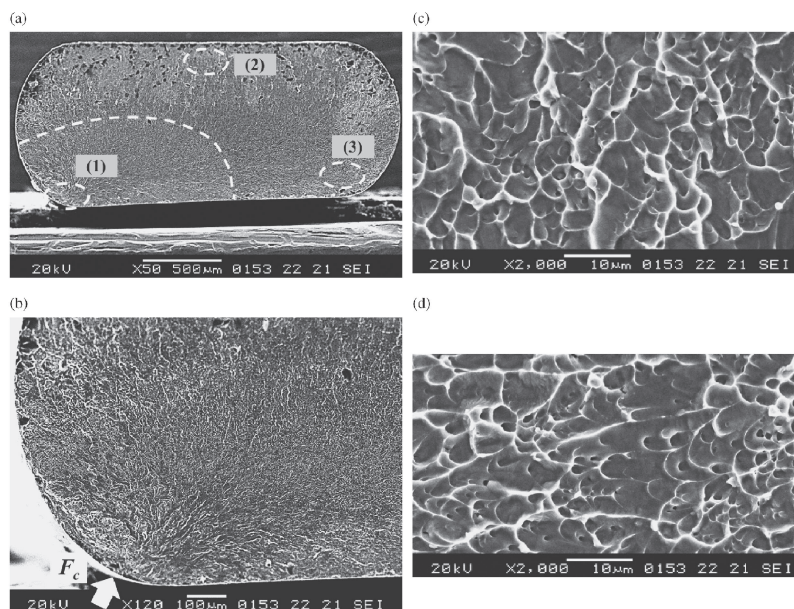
SEM photographs of fracture surface of USP tape with $d = 0.8$ mm and $c = 4000\%$ for $\epsilon_a = 1.64\%$ and $N_f = 6788$: (a) whole fracture surface, (b) crack initiation part (1), (c) middle part of unstable fracture (2), and (d) final unstable fracture part (3).
